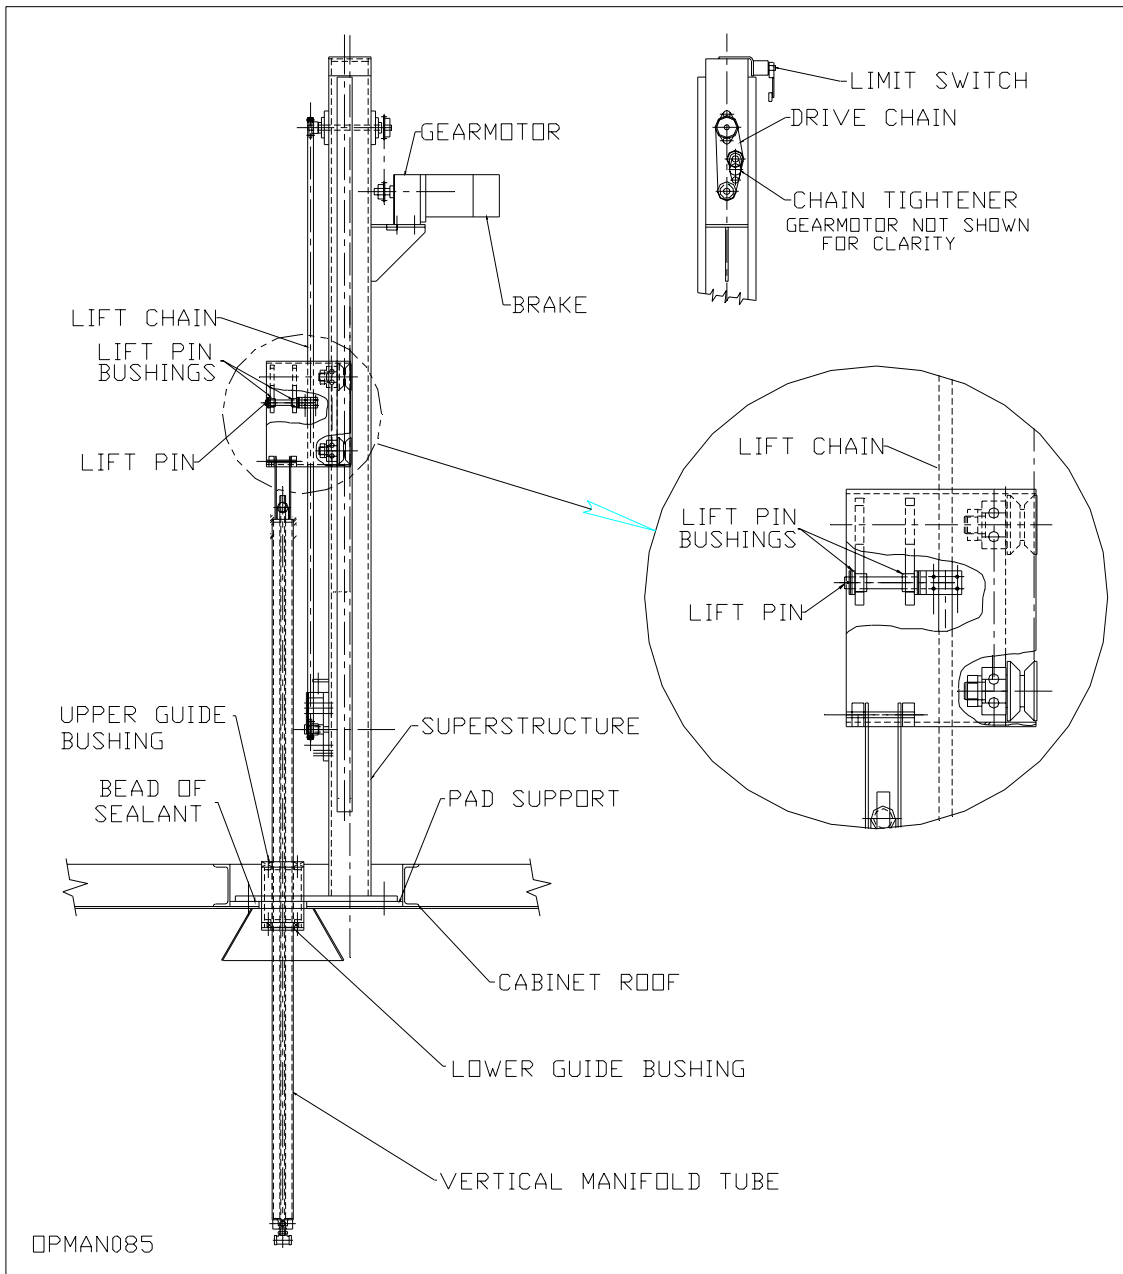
8: Center Manifold Mechanism and Superstructure
